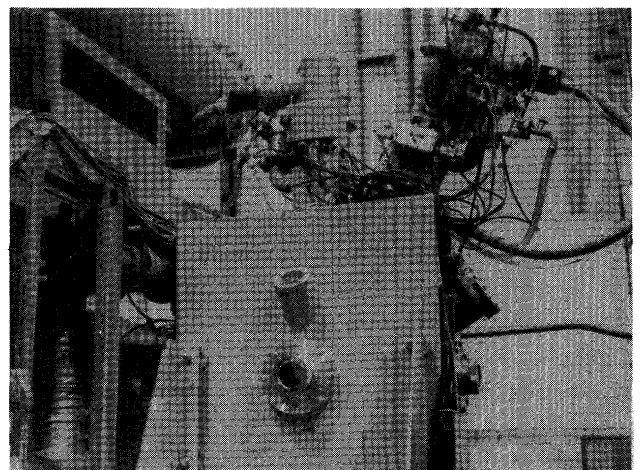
A new 30 kW class Tandem Electron Beam welding apparatus.
